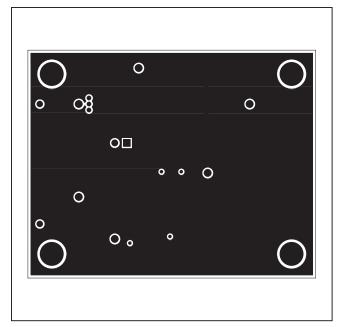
MAX16909 EV Kit PCB Layout—Layer 3
